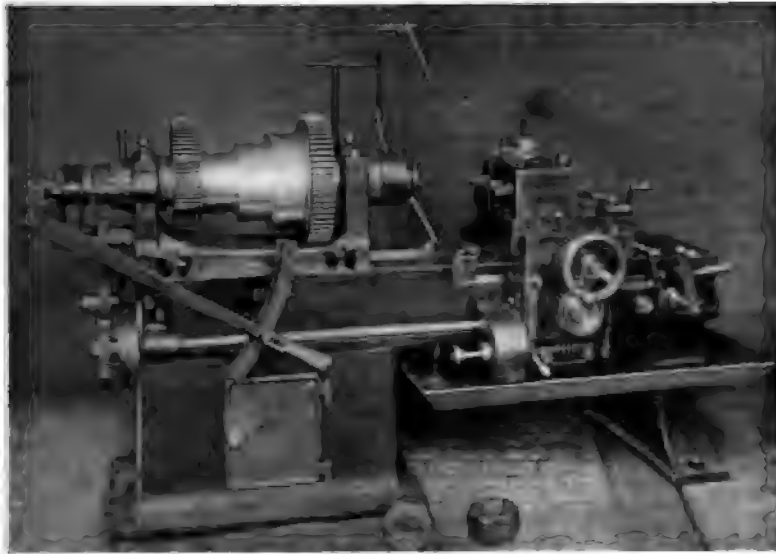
NUT FACING AND CHAMFERING MACHINE.
